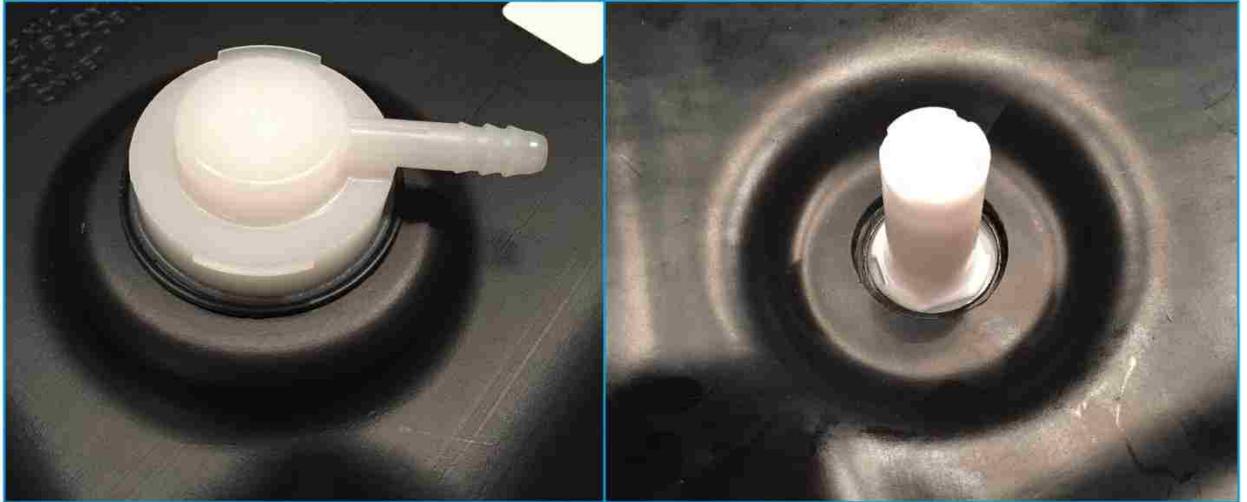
Outside and Inside Image of Component Properly Welded to Fuel Tank Body
